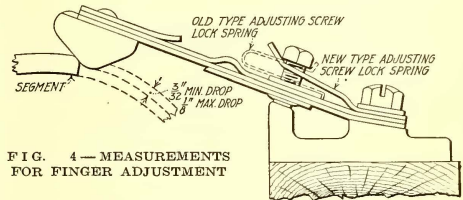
MEASUREMENTS FOR FINGER ADJUSTMENT
